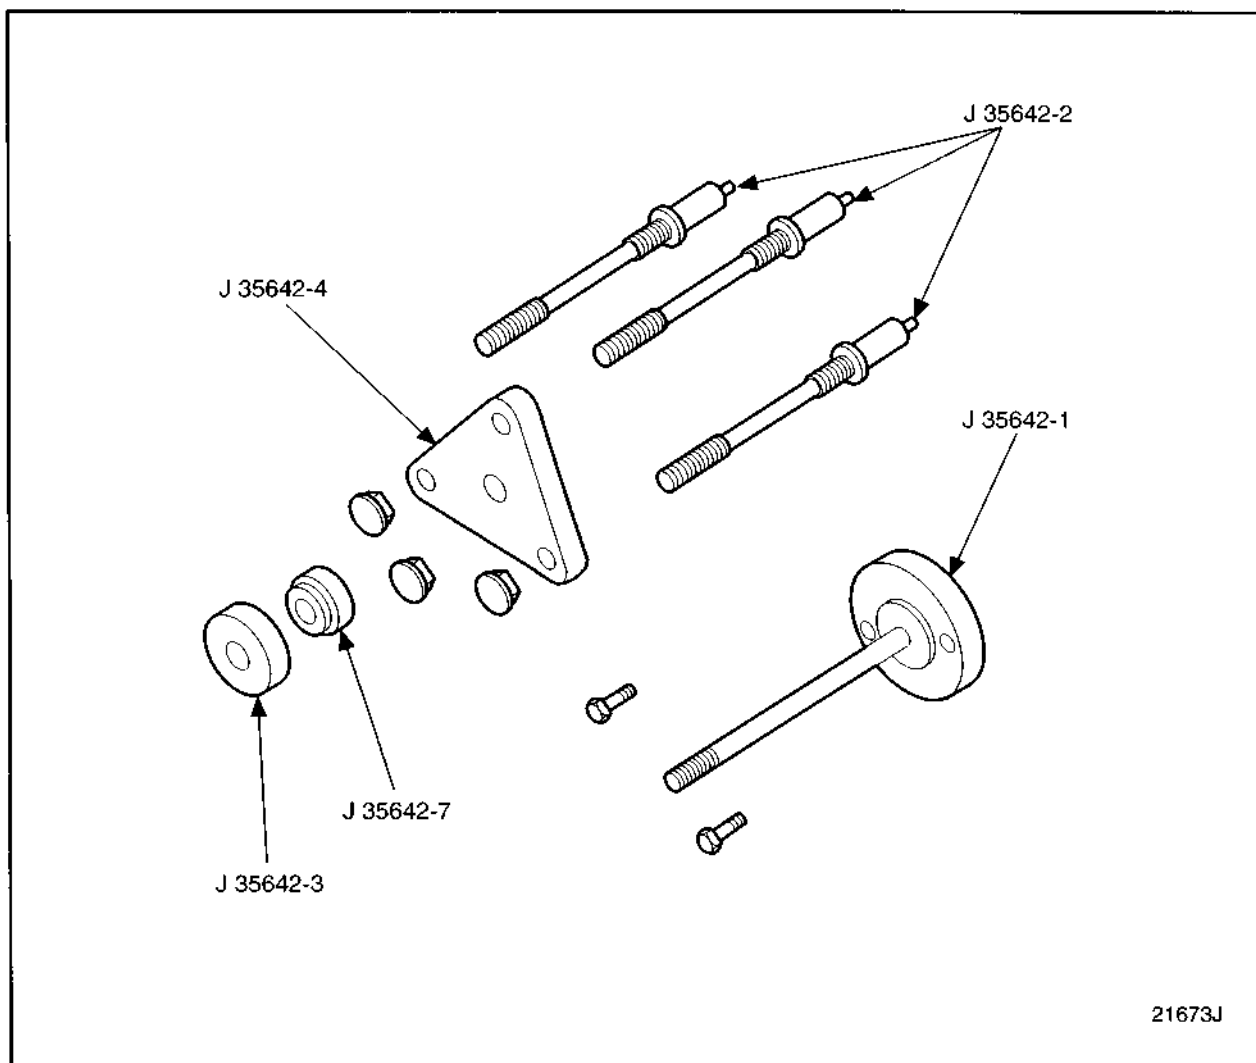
Crankshaft Gear Remover/Installer, J 35642
